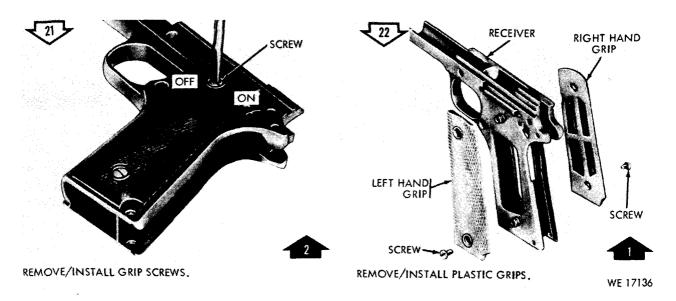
Organizational disassembly/assembly of Caliber .45 Automatic Pistol, M1911A1. (6 of 6)
